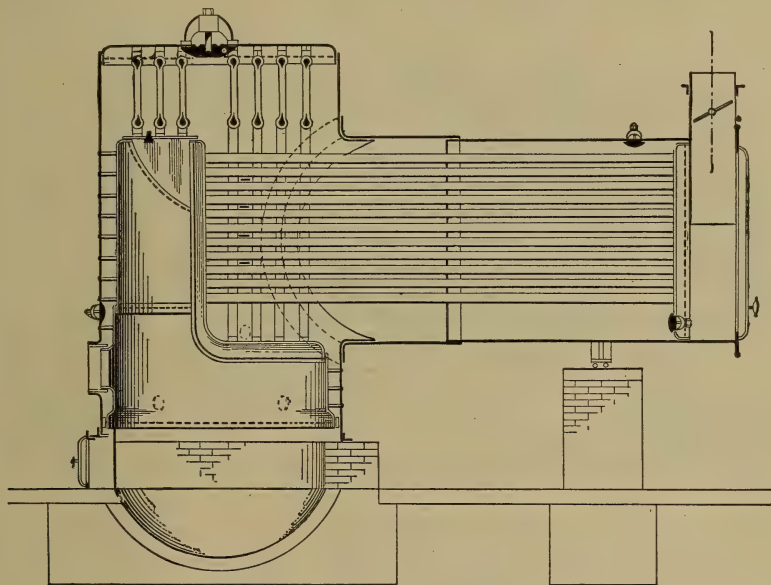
100-horse-power Fitzgibbons Boiler.
